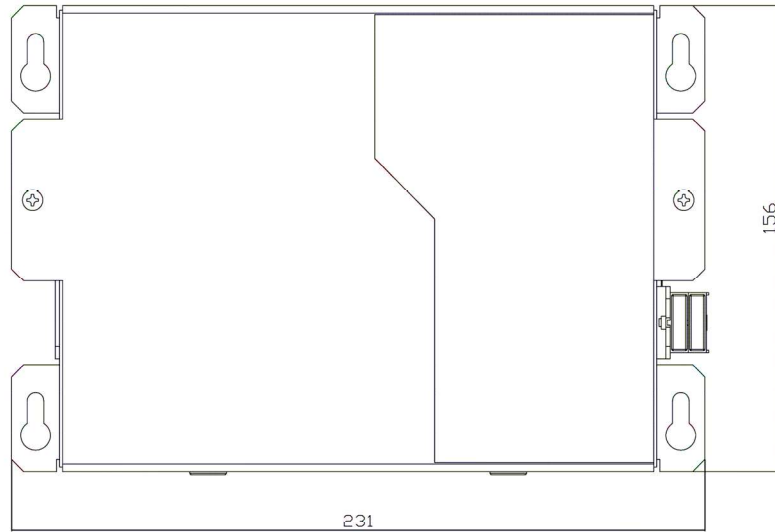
QUINT-BAT/24DC/12AH battery dimensional drawing
